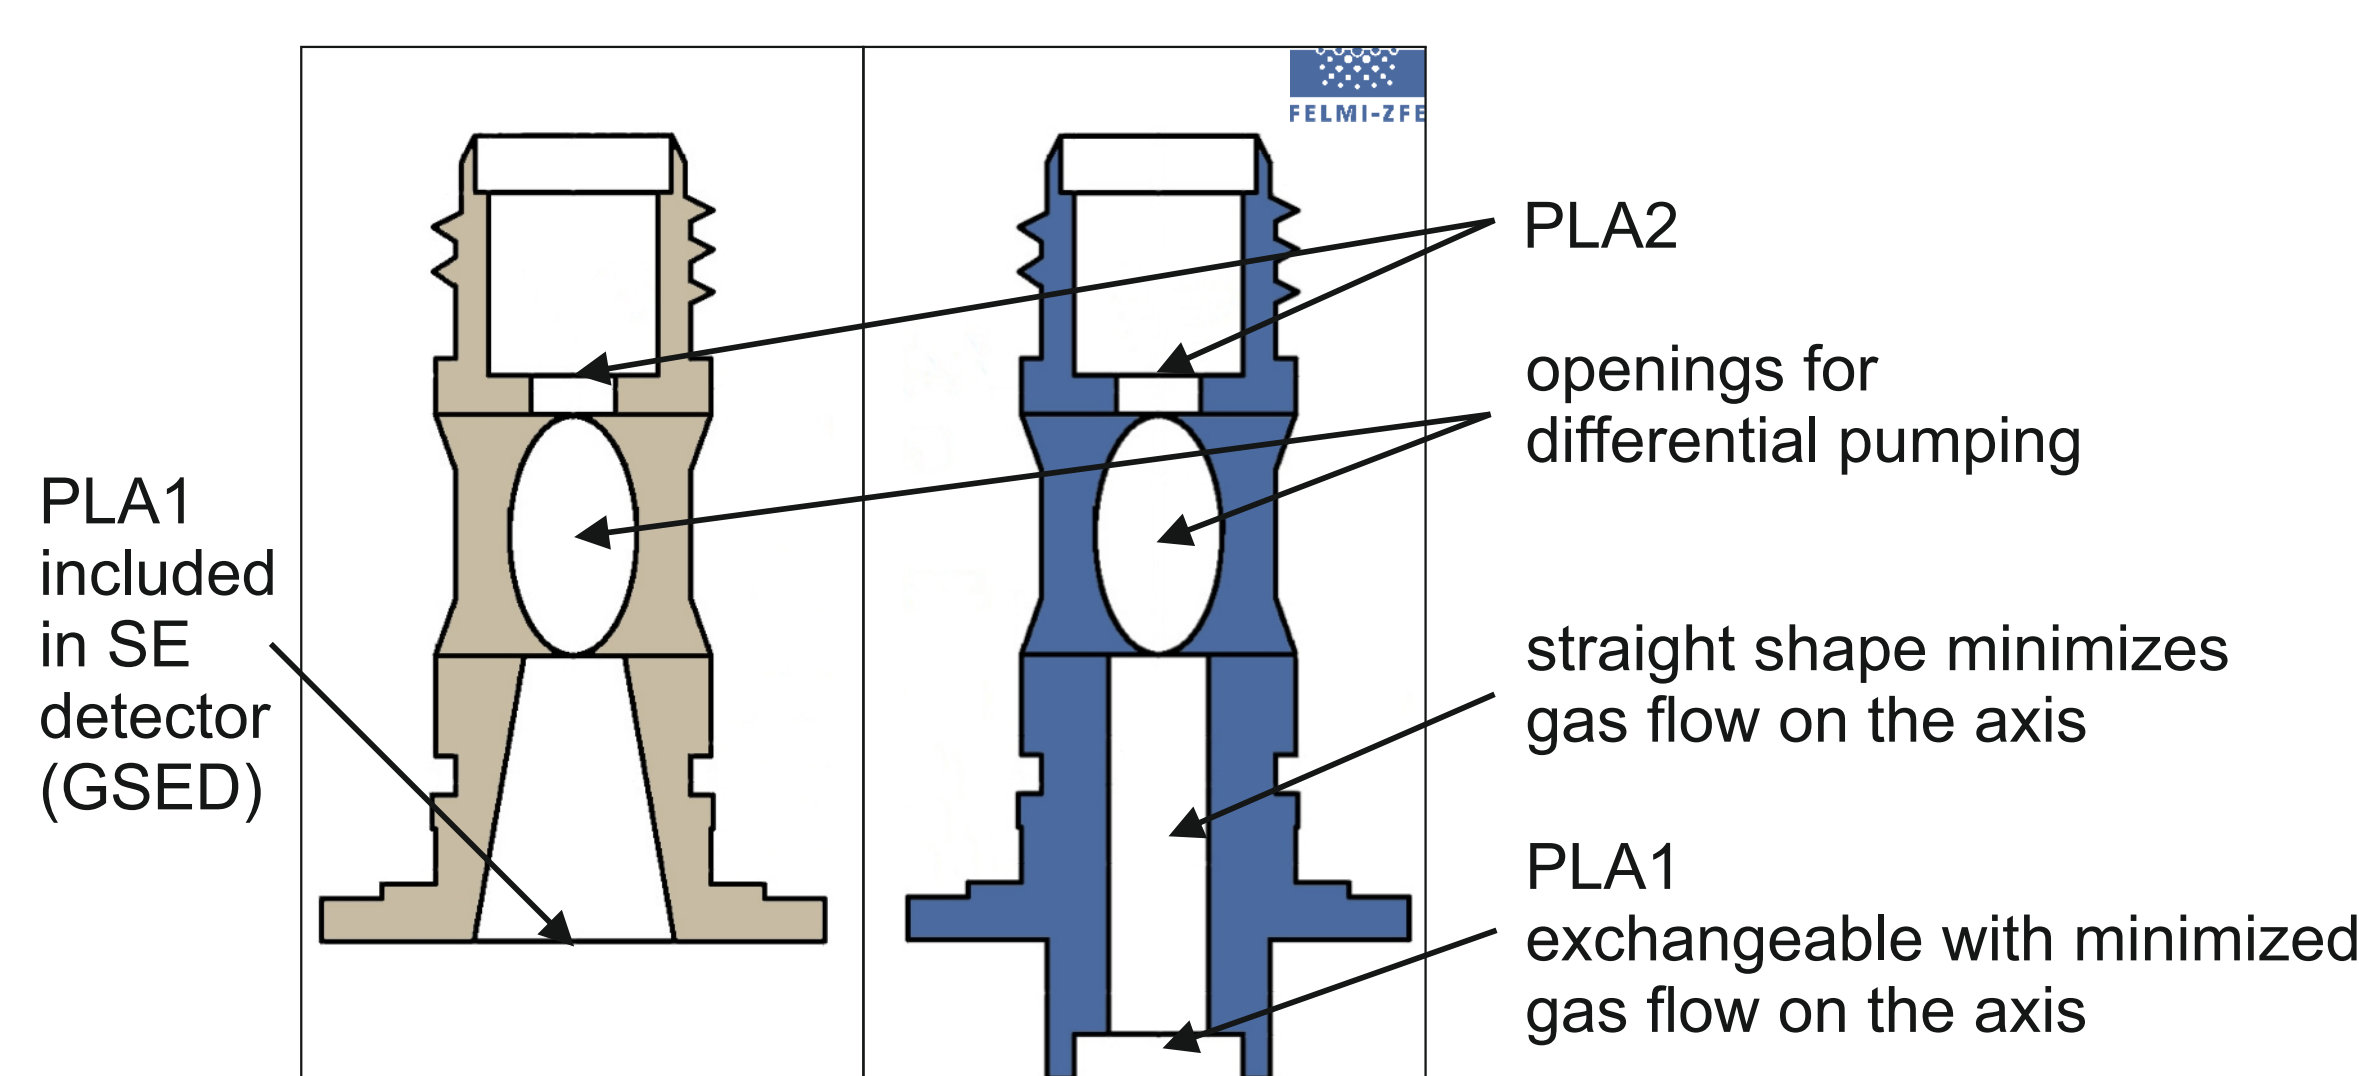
Schematic drawing of the pressure limiting aperture holder left: original design; right: new design
